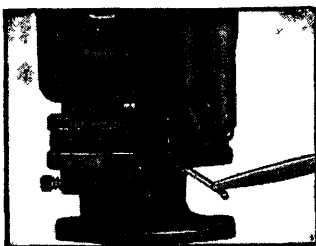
Disconnect pump connector link at both ends. Check throttle shaft lever and pump connector link for wear
